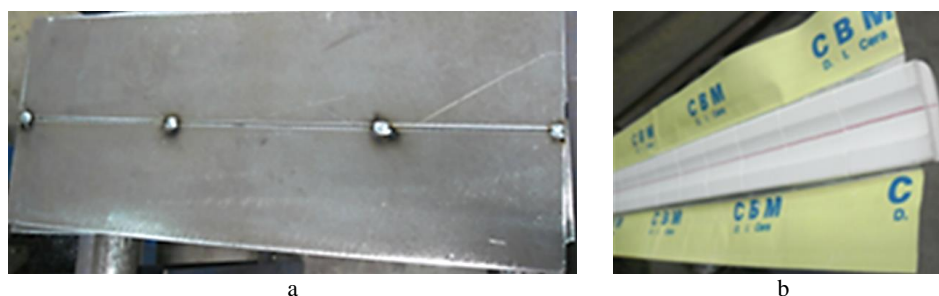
The base material prepared for welding the samples: a – plate; b – ceramic strip.
